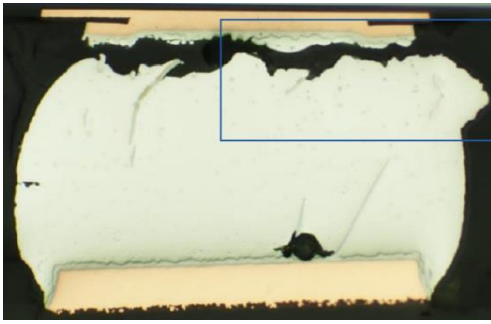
Leg 1 (baseline + SAC405 ball) solder fatigue crack at package side.
